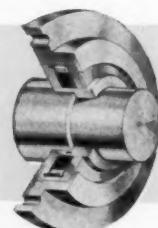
Where process fluids are not extremely toxic or explosive, an auxiliary throttling bushing provides auxiliary protection in the event of seal failure.
